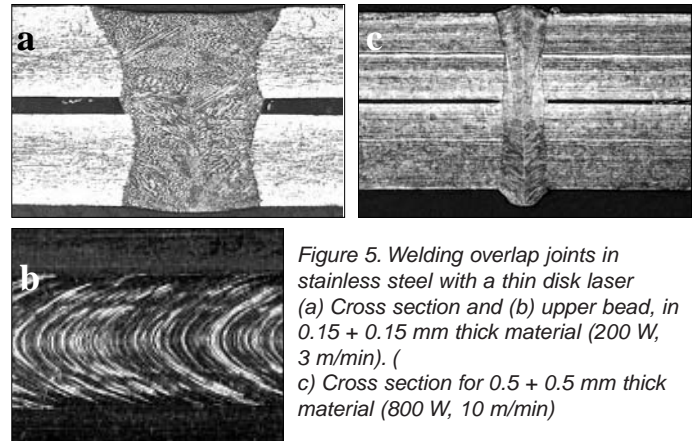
Welding overlap joints in stainless steel with a thin disk laser (a) Cross section and (b) upper bead, in 0.15 + 0.15 mm thick material (200 W, 3 m/min). (c) Cross section for 0.5 + 0.5 mm thick material (800 W, 10 m/min)
